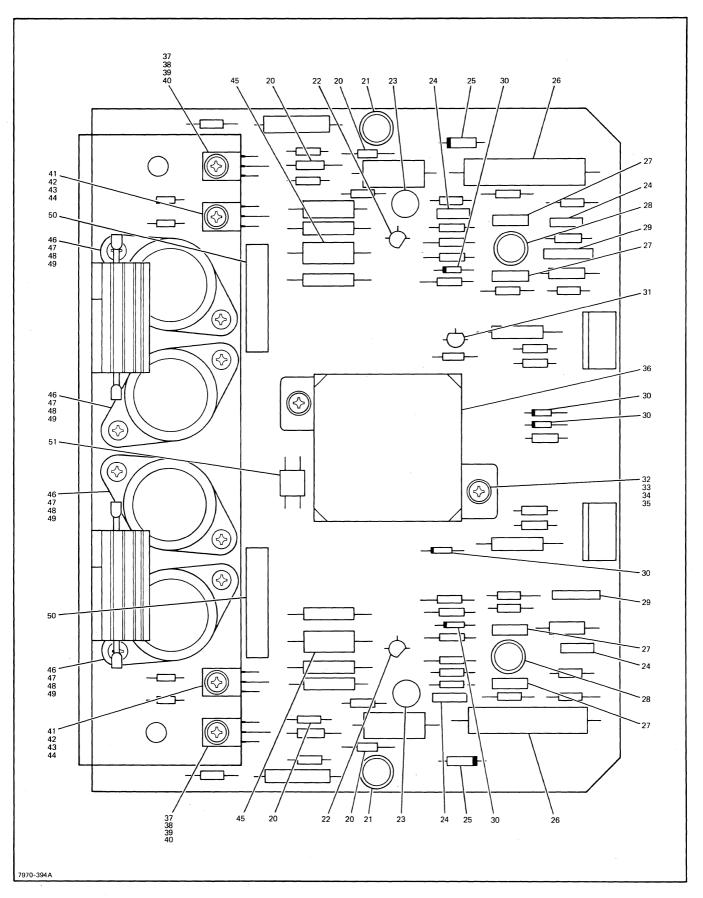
Reel Servo PC Assembly A7 (Sheet 2 of 2)
